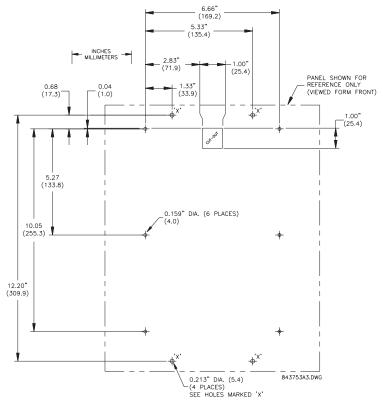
L60 VERTICAL SIDE MOUNTING REAR DIMENSIONS
